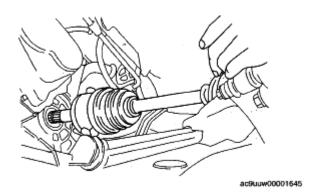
Identifying Front Drive Shaft Installation Position Courtesy of MAZDA MOTORS CORP.
